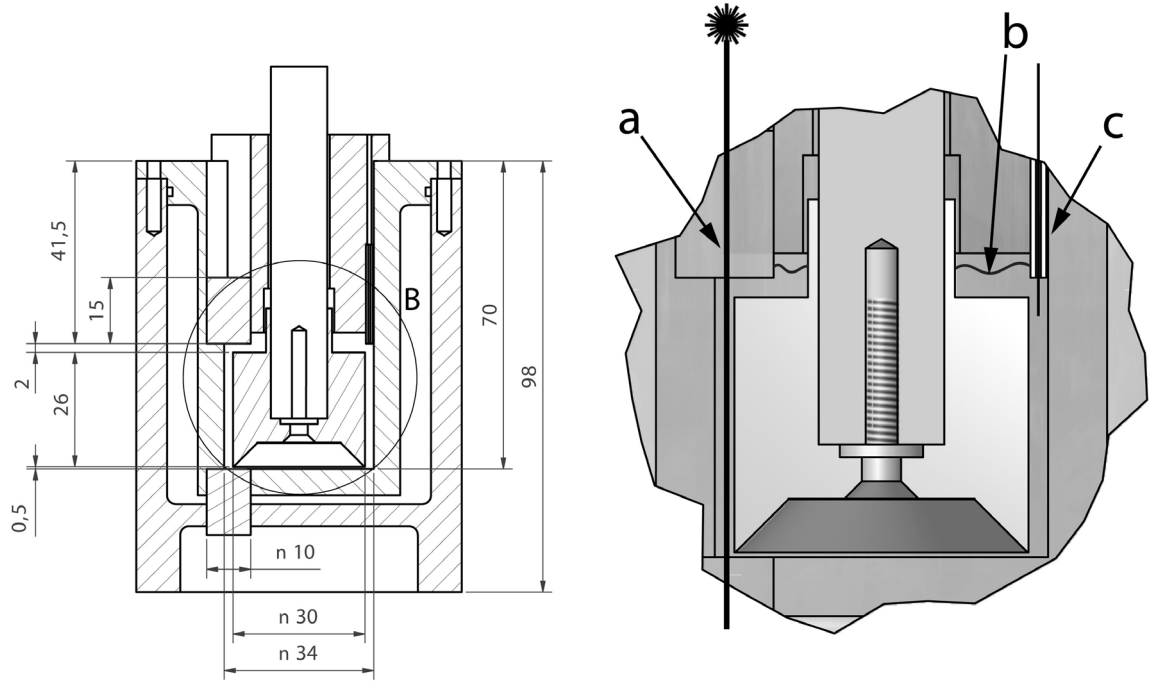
A technical drawing of the shear cell with lengths indicated in mm (left) and a close up of the central part of the shear cell (right). Arrows show the optical glass inserts with passing laser beam (a), the level to which the sample is filled into the shear cell (b), and the temperature sensor (c).
